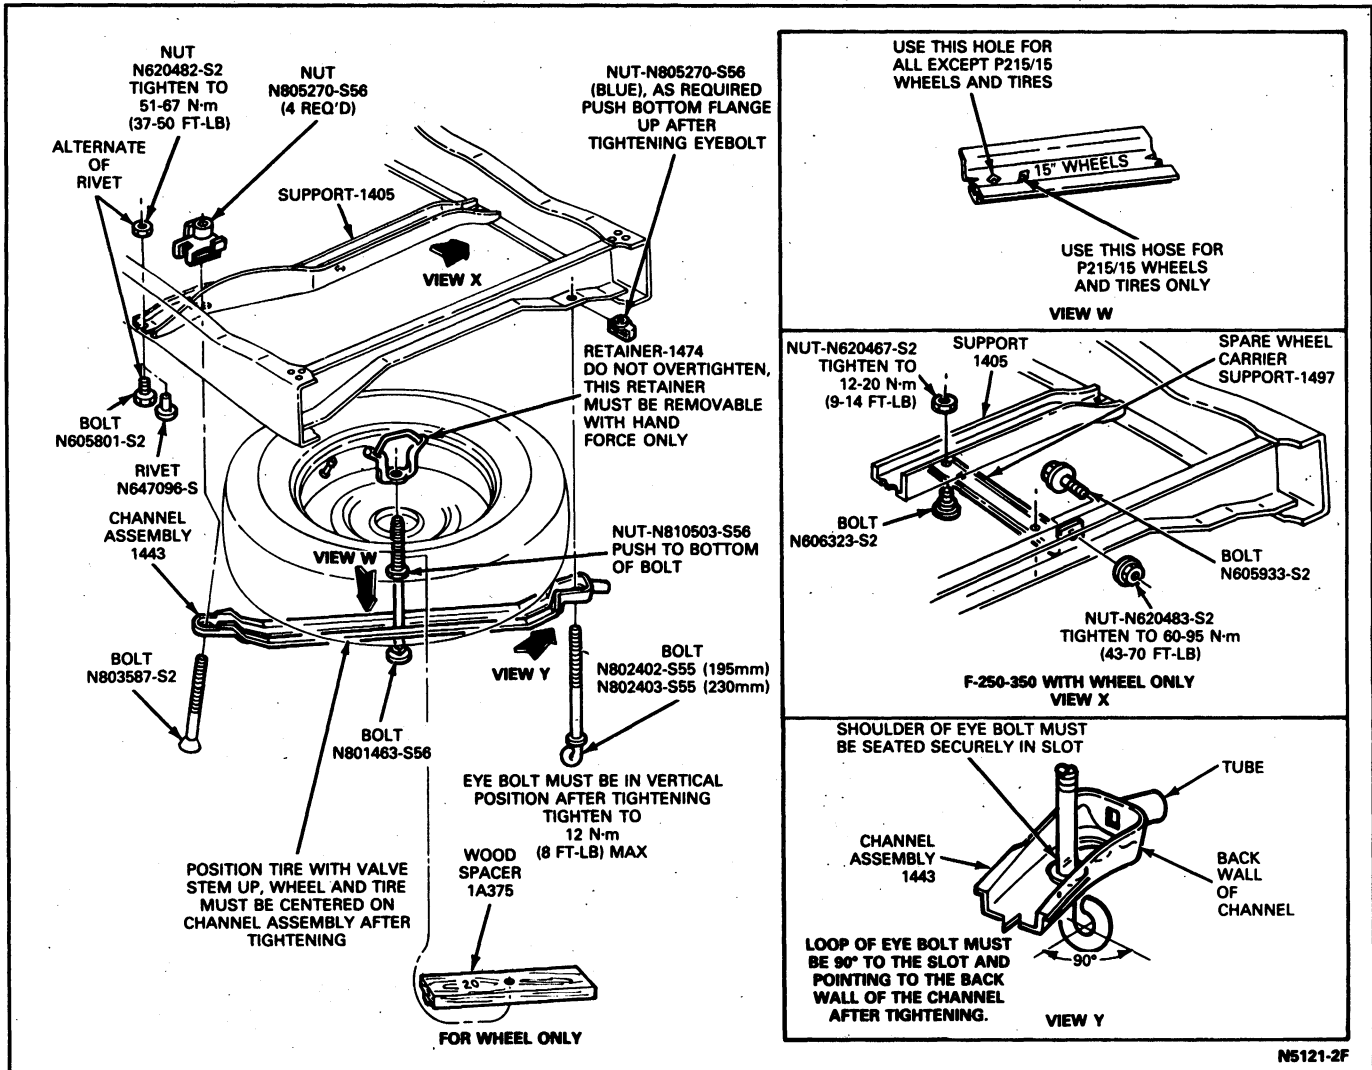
Spare Tire Carrier—F-150—F-350 Without Aft Axle Tank
